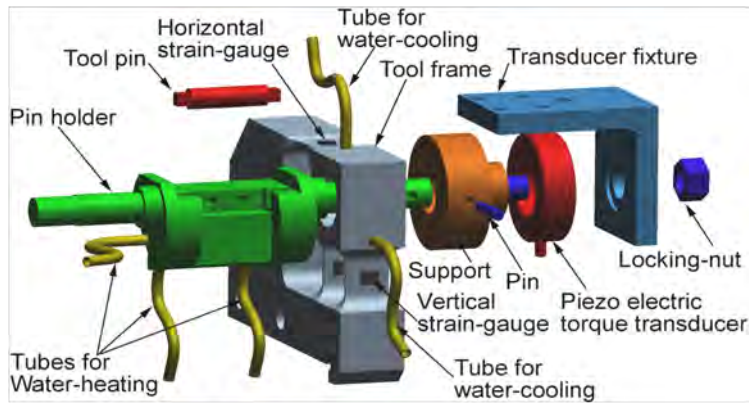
Exploded view of the BUT equipment showing the transducer design and tool preheating system [155].
